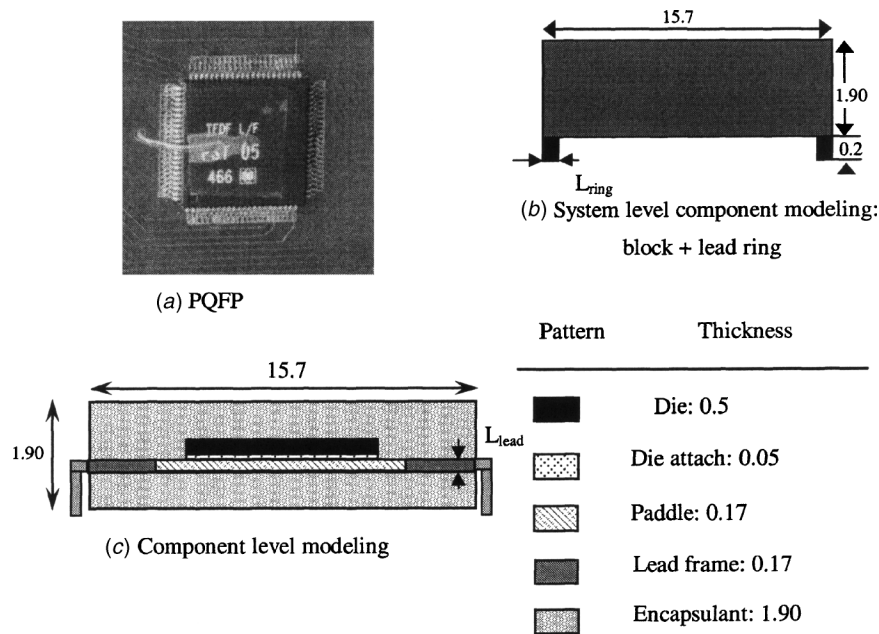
PQFP and the detailed dimension for component level modeling (All dimensions in mm)
